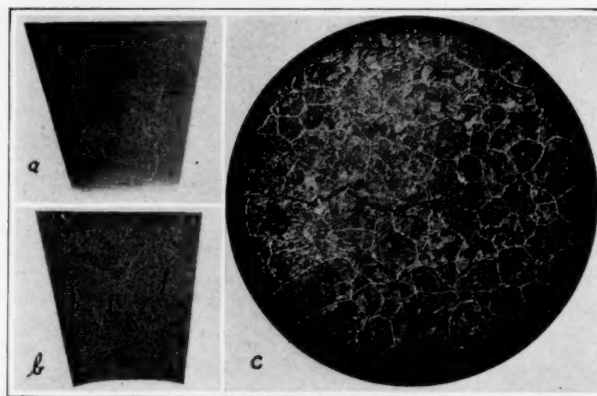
DEFECTS IN GUN FORGINGS REVEALED BY DEEP ETCHING
